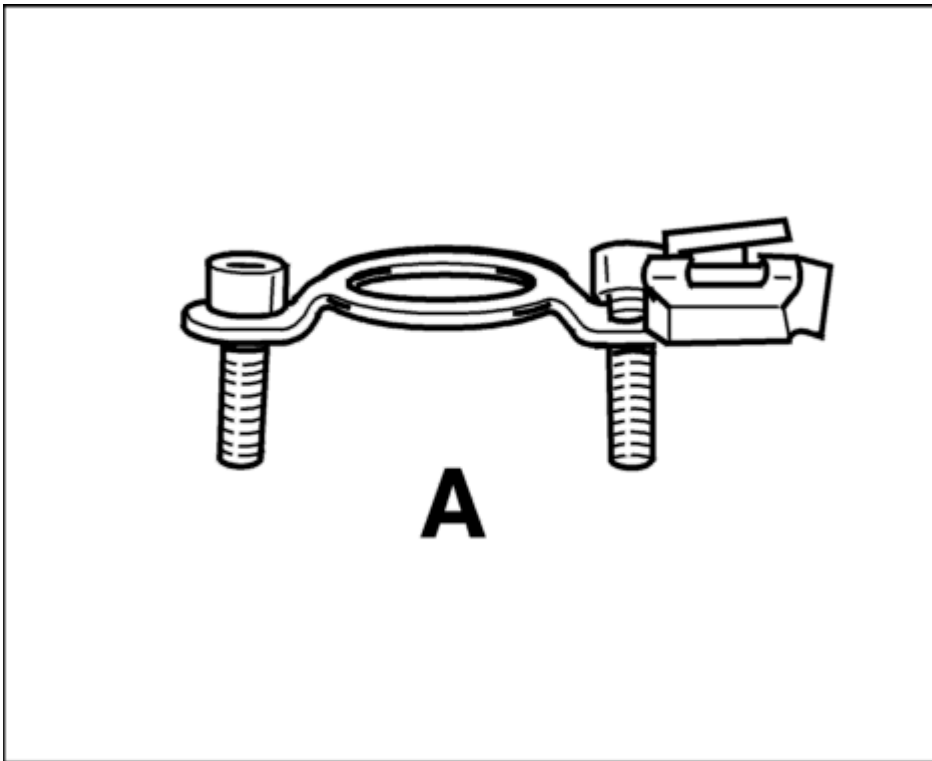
Holder for solenoid hydraulic valve for camshaft timing
